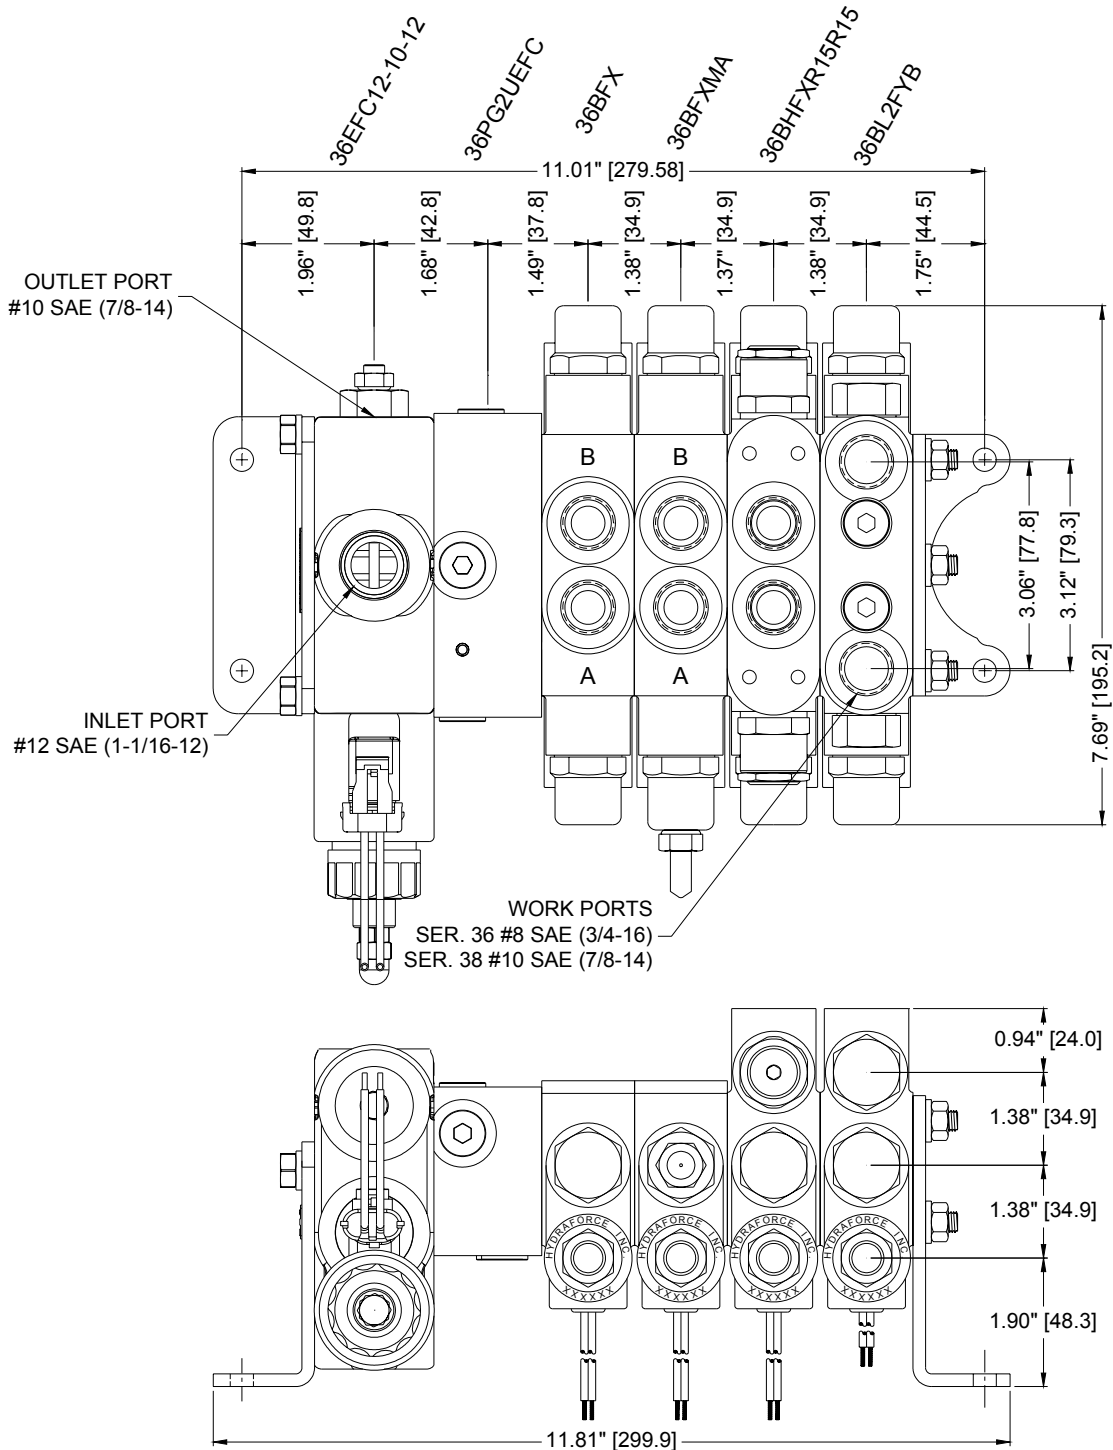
Dimensional data for various 36EFC valve sections in inches & [millimeters].
